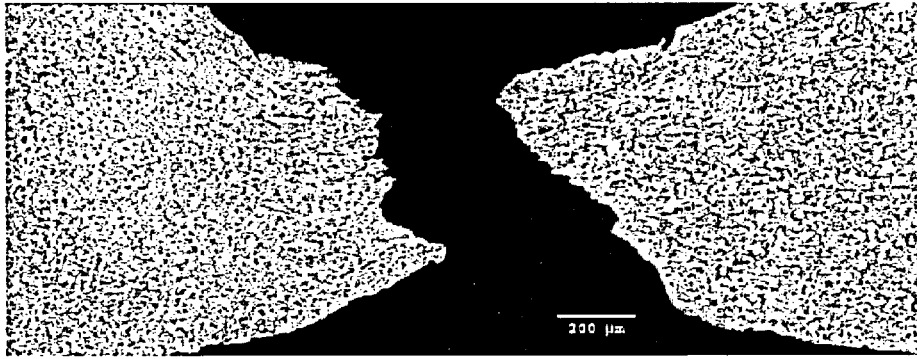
Metallographic cross section of tear #8-1. This sample contained a single repair weld surrounded by a region of recrystallized weld metal representing the original weld. Tearing occurred in either the recrystallized weld metal or the heat affected zone adjacent to the weld, and was accompanied by substantial localized plastic deformation.
